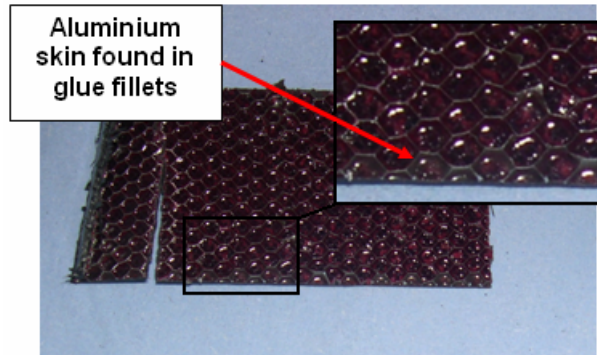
Aluminium located in glue fillets of Wedge-1 debonded skin
